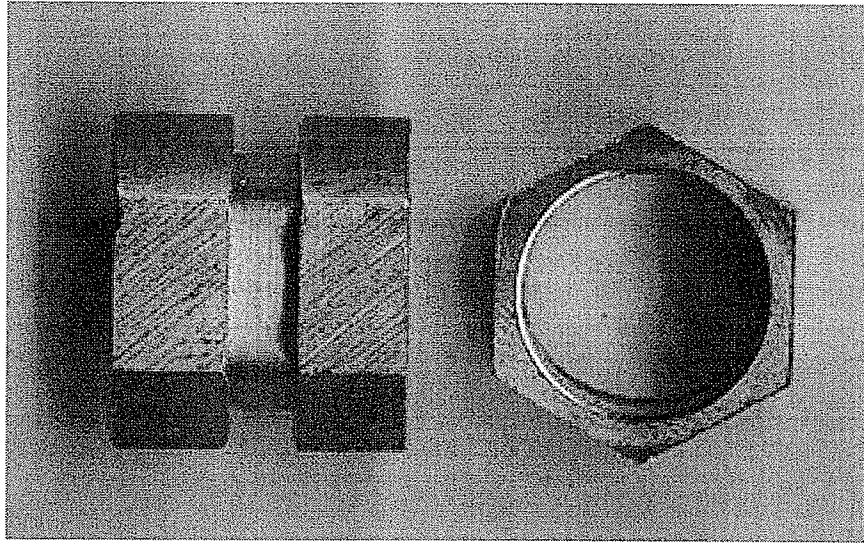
Tubular specimen with hexagonal flanges before torsional loading
